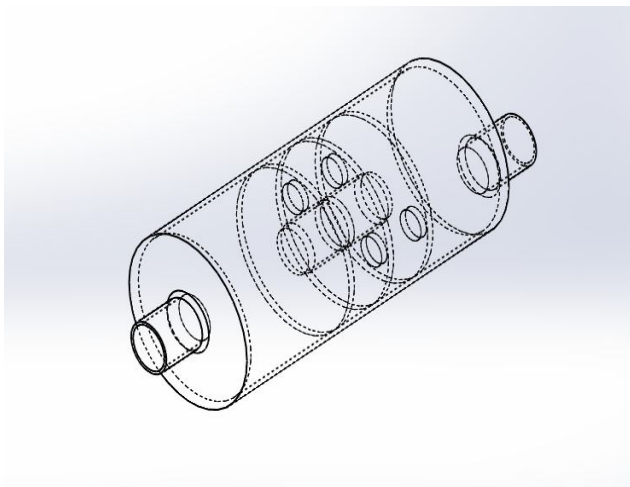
Wire frame model of circular cross sectional muffler with single outlet
